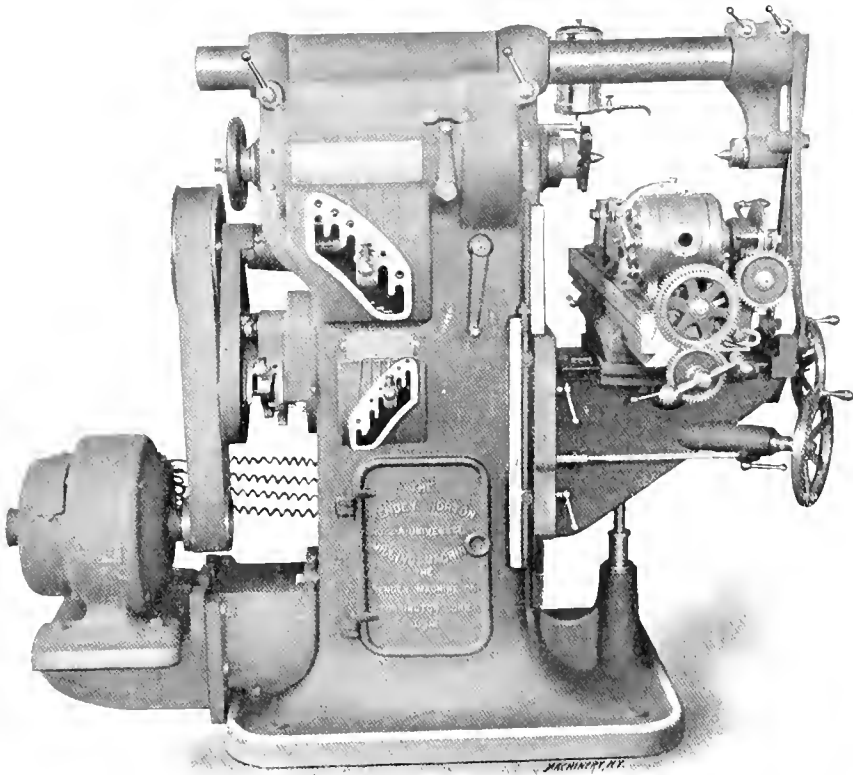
Hendey-Norton, Geared Speed Miller, Left Side.
